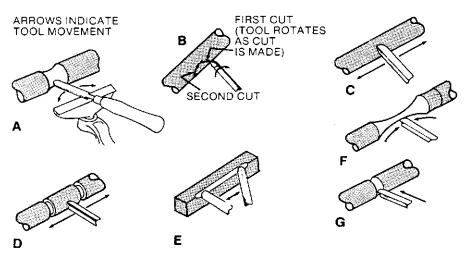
The gouge is a very versatile lathe tool. It can be used to: (A) shape a cove (scraping action), (B) shape a cove (cutting action), (C) smooth a cylinder, (D) cut away stock between shoulders, (E) round, (F) shape, and (G) make small coves (determined by the size of the gouge—scraping).
